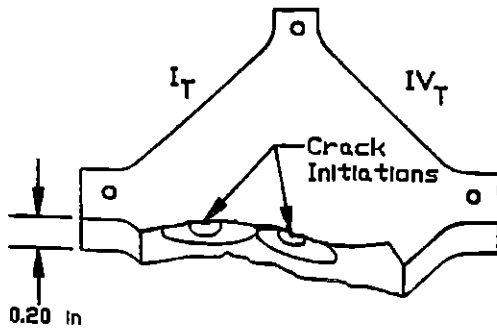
Sketch of fracture surface with beach marks, specimen 3X3 in (7.6x7.6 cm)
